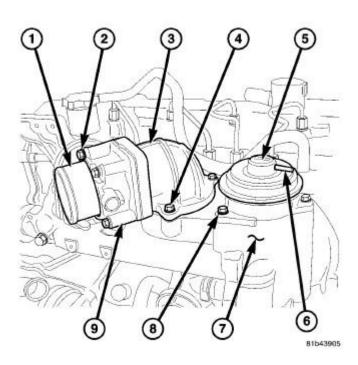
EGR VALVE/EGR AIRFLOW CONTROL VALVE Courtesy of CHRYSLER LLC
